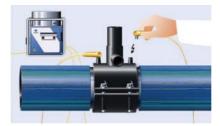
Welding in accordance with DVS 2207. Part 1
